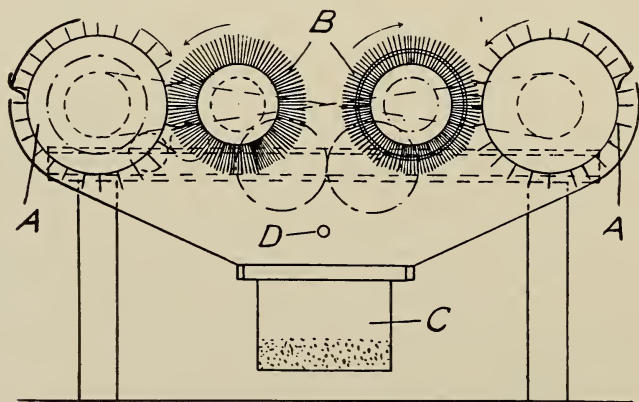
SEPARATING RUBBER AND FABRIC.
